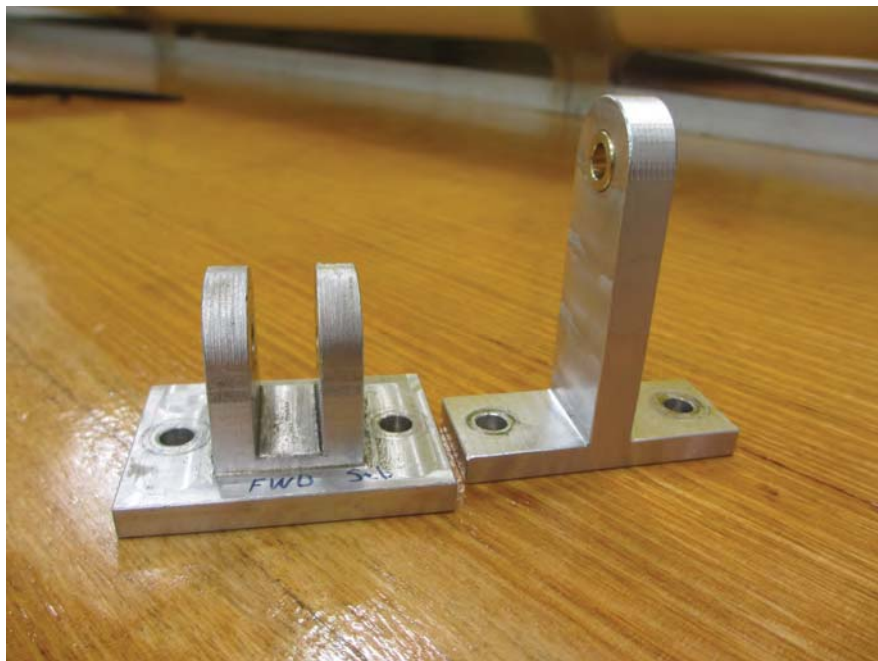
Photograph of the previous pin joint mount (left) and the new pin joint mount (right) - Part 1 which was mounted on the backbone beam.
